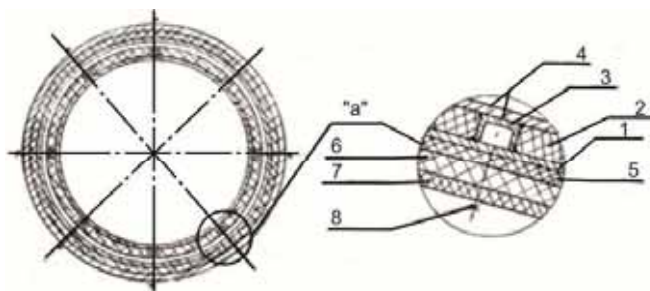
Silencing the tumbling barrel noise: 1 - the barrel outer coat; 2 - mineral wool layer; 3 - fastening channel; 4 - inner coat; 5 - inner gum coat; 6 - mineral wool layer; 7 - outer gum coat; 8 - a screw with spring washers connecting gum coats with the main body
